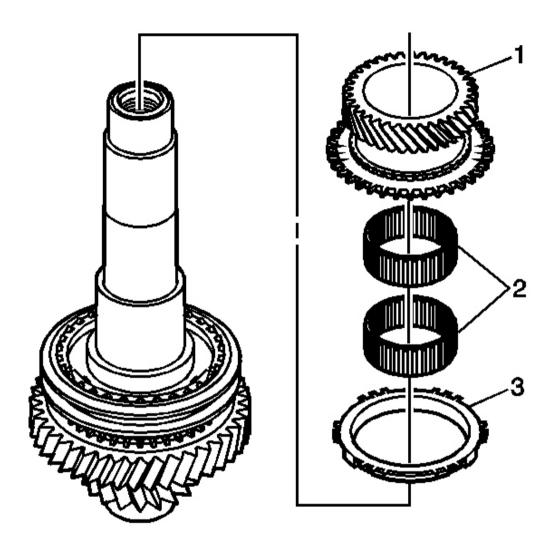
Installing 5th Gear, Caged Needle Bearings And 5Th Gear Blocking Ring Courtesy of GENERAL MOTORS CORP.
